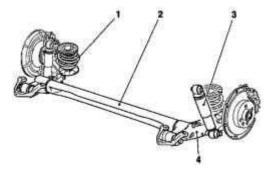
Rear suspension: 1 - Rear spring, 2 - elastic profile (crossbar), 3 - shock absorbers, 4 - lever with a longitudinal mounting of the rear axle
